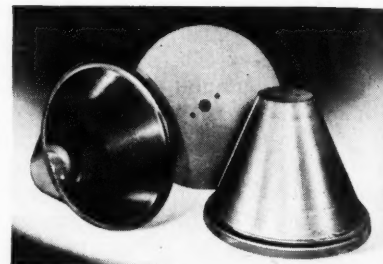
Stainless-steel cones for television produced by metal spinning machine shown in Fig. 1
